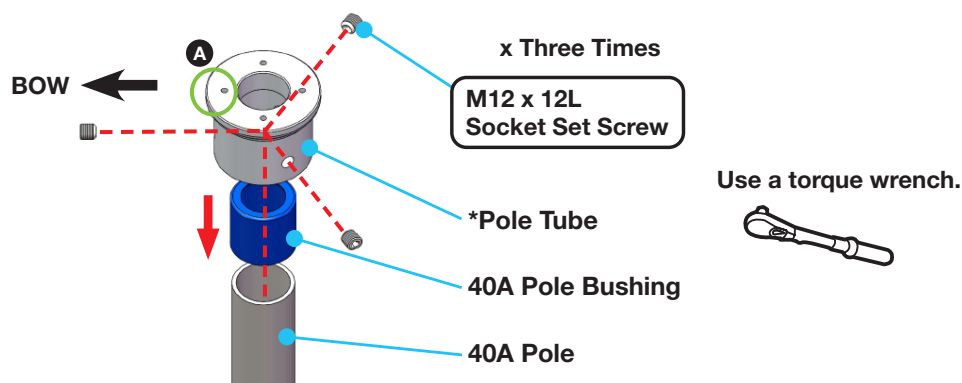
Installing 40A Pole Bushing inside Pole Tube
